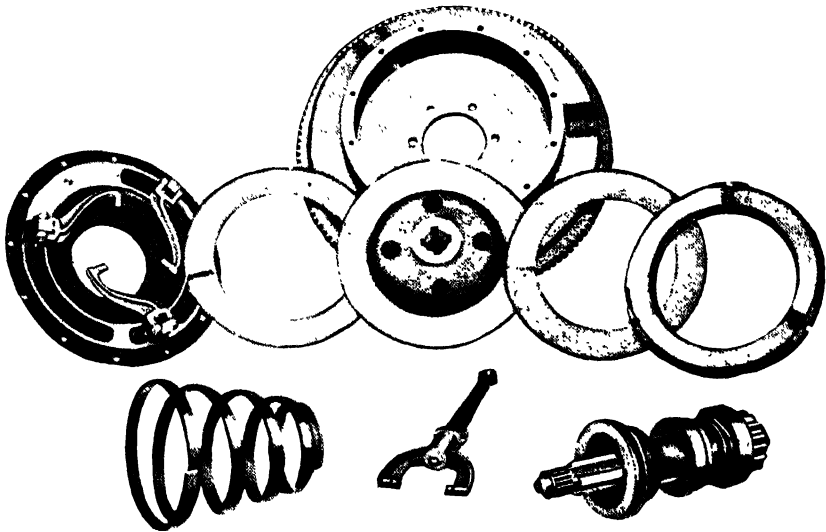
Clutch Dry-plate Type. (Borg & Beck.)
